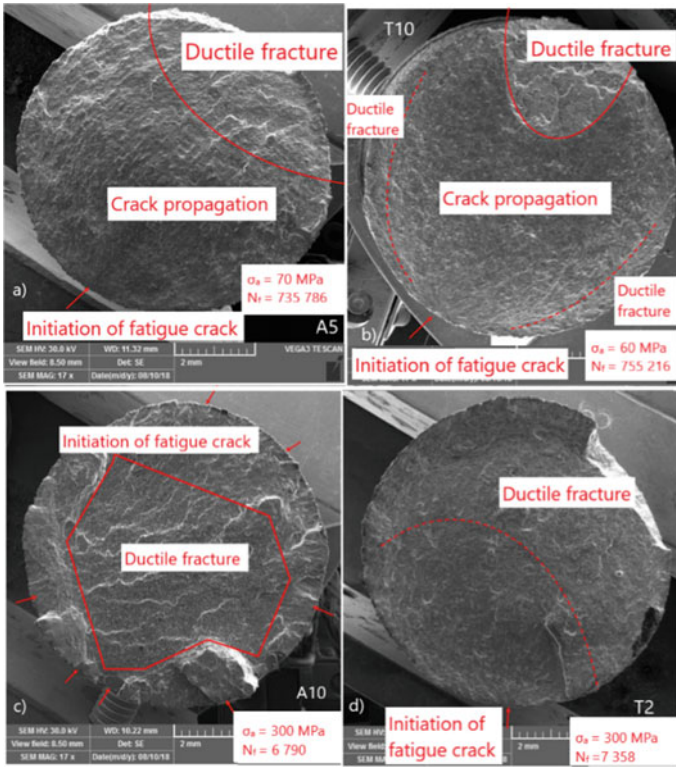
Fractography of specimen a A5, b T10, c A10 with multiple fatigue crack initiation sites, and d T2 with single crack initiation site
